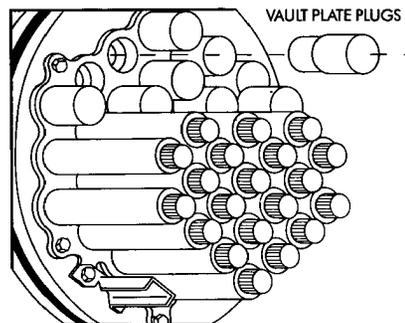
Outside View of Tip Cables Inserted in End Plate
